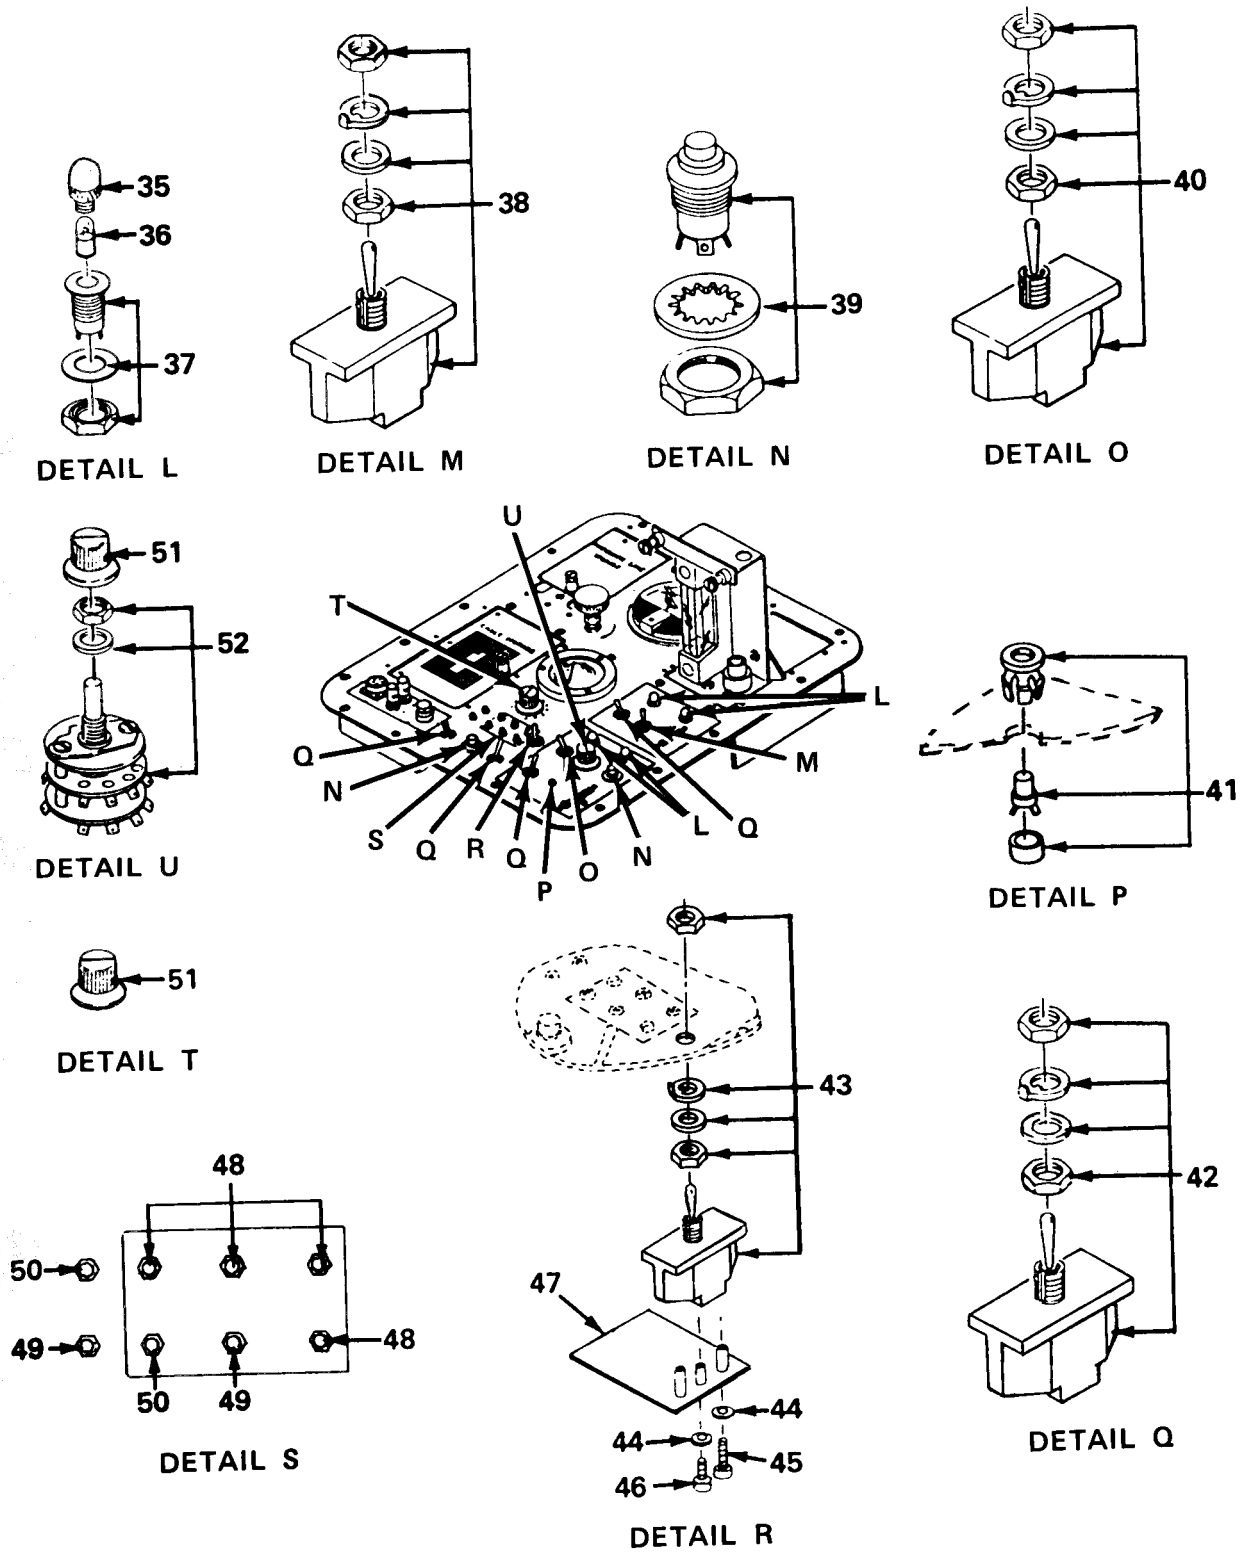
, Group 02. Test Set Panel Assembly (Sheet 4 of 7) Change 2
